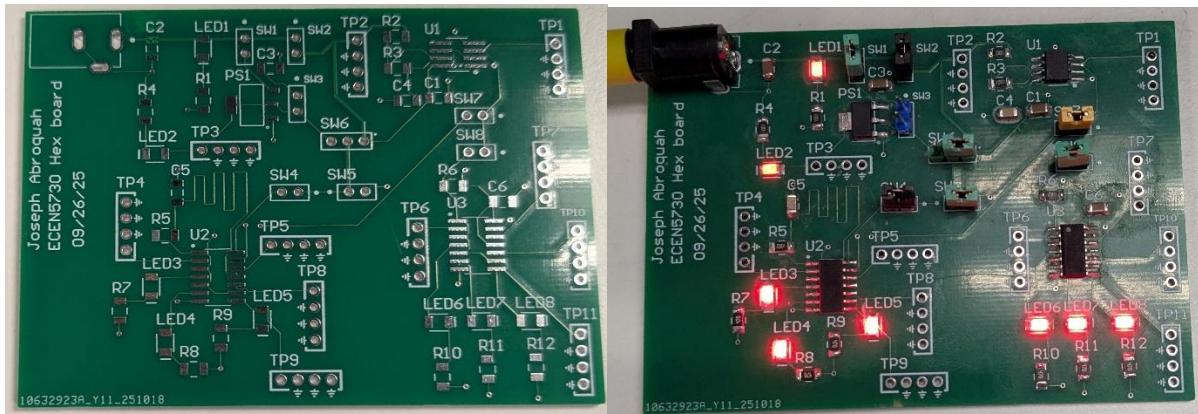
Fabricated (unassembled) board on the left and assembled board on the right
